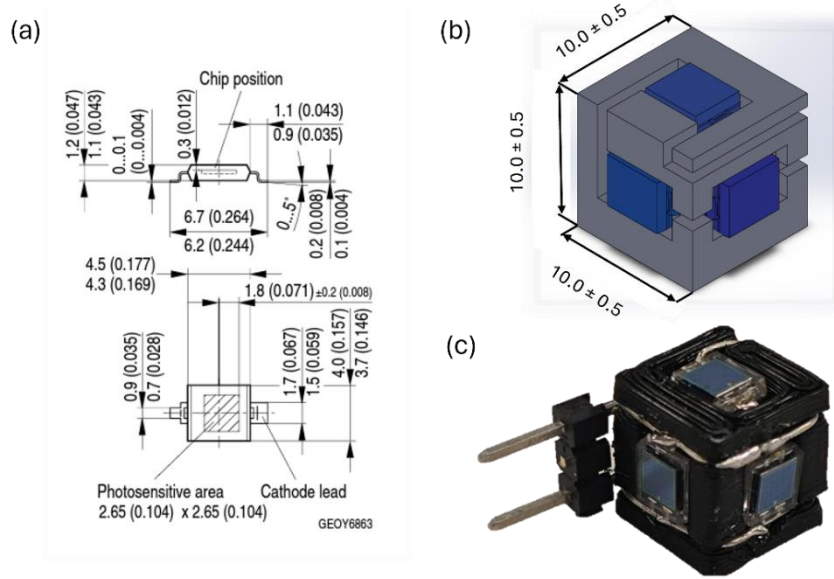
BPW34S photodiode. (a) device dimensions; (b) design and dimensions of the 3D sensor; (c) real device. All the dimensions are in mm.
